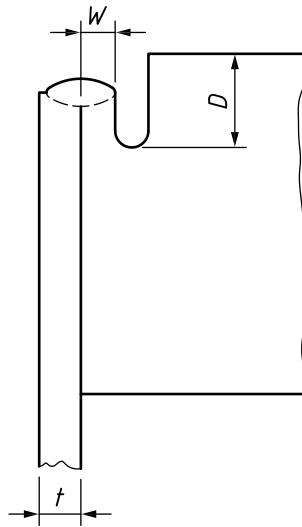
Tube to tubeplate connections, castellated weld
